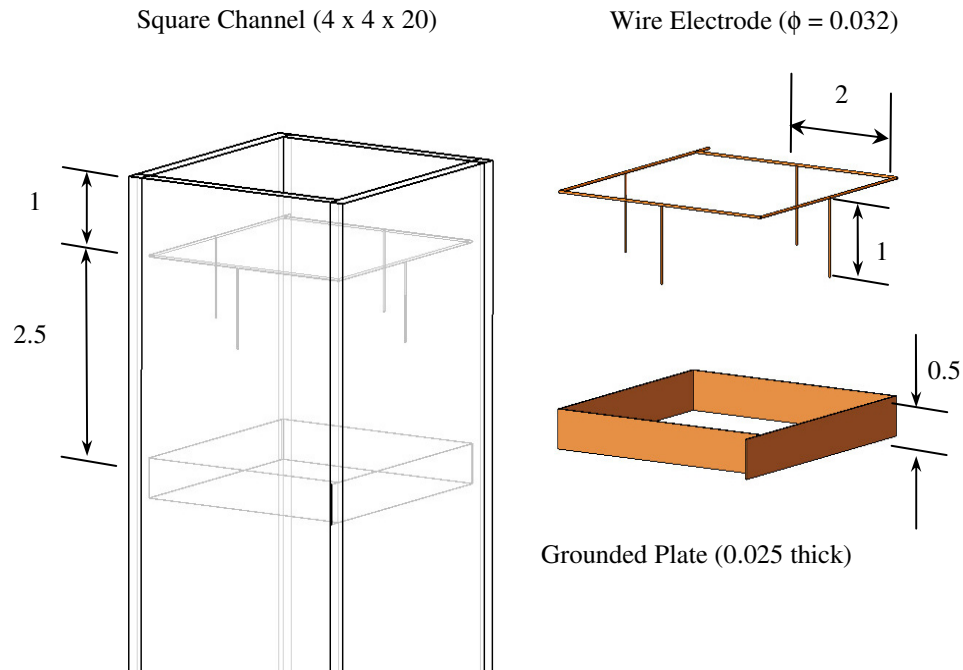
Configuration of EHD pump test unit (4 pins, dimensions in inches)
